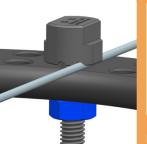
Assemble Wire to Side Load Wire Clamp on the Ring, or assemble Wire to Standard Wire Clamp or Side Load Wire Clamp on the Advanced Clamp Post
